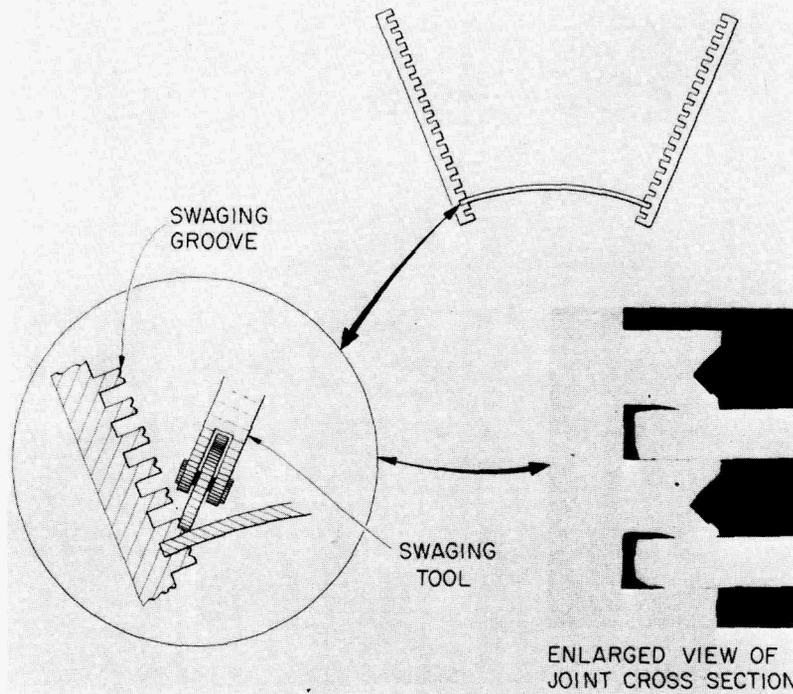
Technique Used to Fabricate Roll Swaged Joint.
